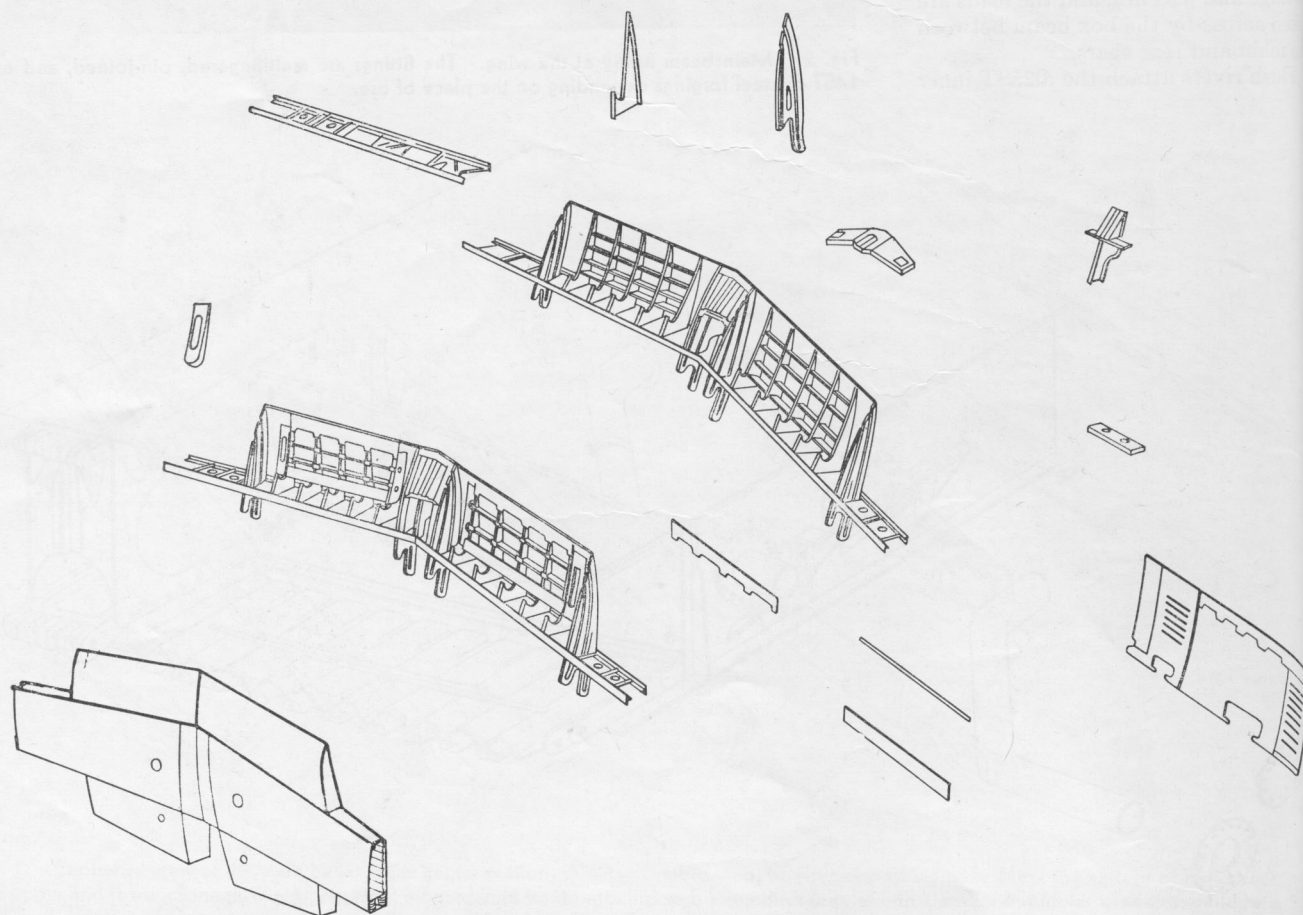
Exploded view of the T.E. of the center section, showing sheet-metal ribs and intercostal stiffeners, which support the upper skin, and Lockheed-Fowler flaps, which form the lower skin when closed.
